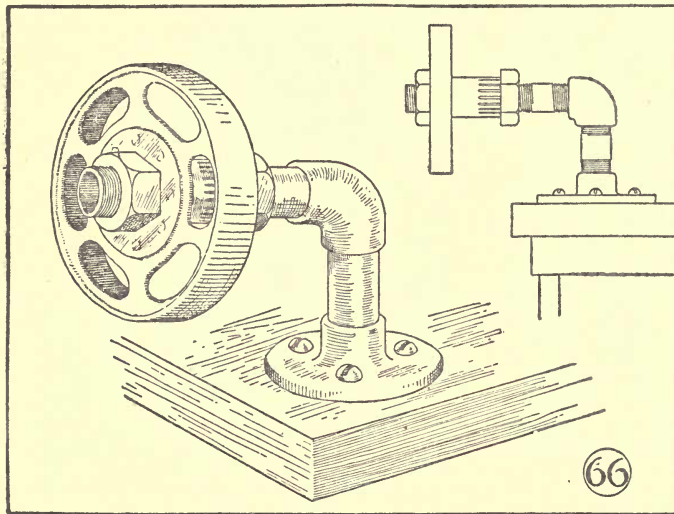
A jig for clinching the rivets in the transmission brake linings
